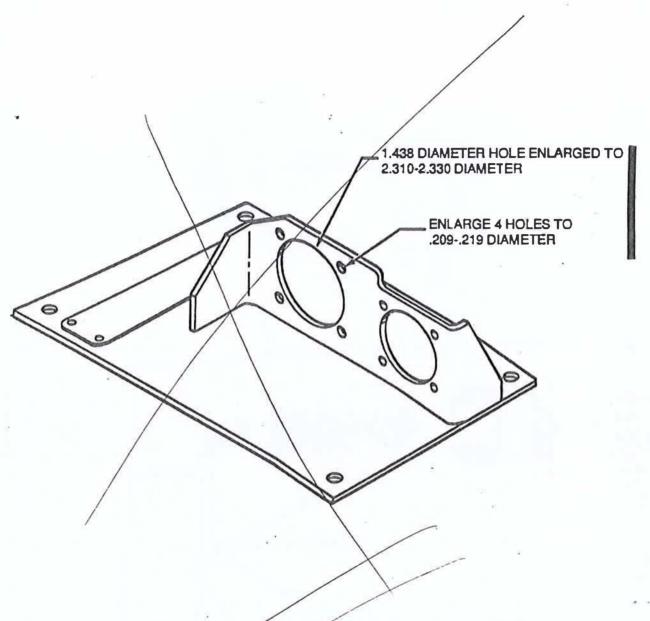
Conversion of Generator Wire Support Bracket P/N 11682725 to Bracket P/N 11673848
